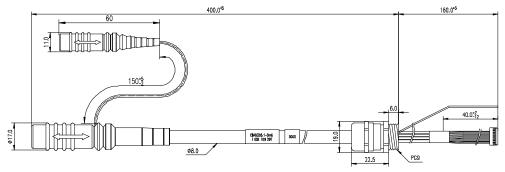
CBAM305.1-0m6 Cable - Dimensions
